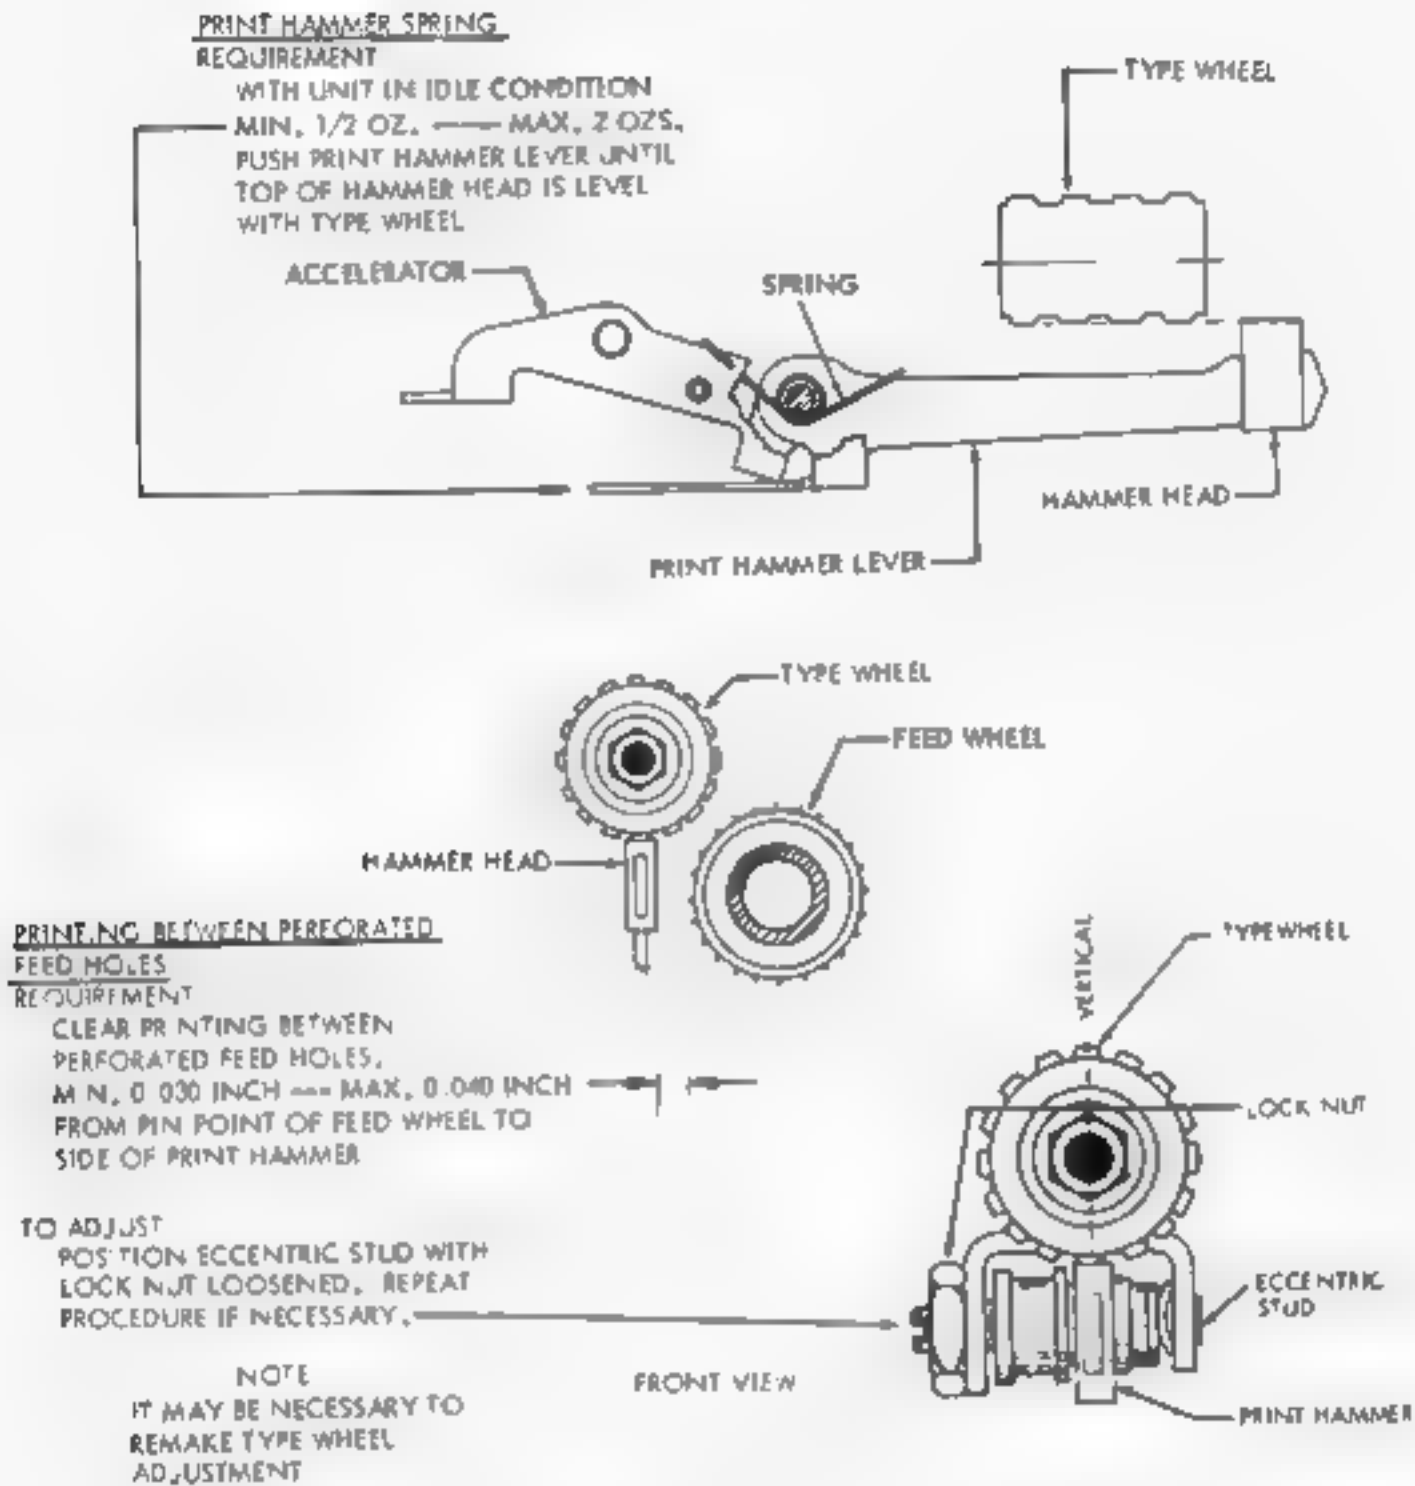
PRINTING MECHANISM FOR FULLY PERFORATED TAPE
